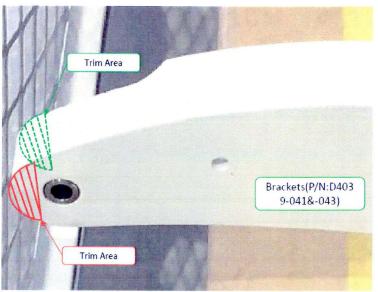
MODIFICATION TO D4039-041/-043 BRACKET ASSEMBLIES
